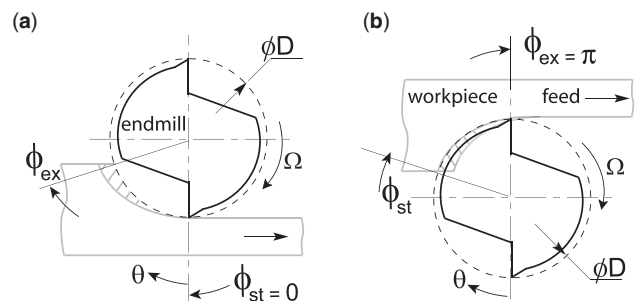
Cutter-workpiece engagement configurations: (a) up-milling and (b) down-milling. Both the cases illustrated are for radial immersion below 50%. The tooth engagement angle is designated ϕ . The entry angle is ϕ_{st} and the exit angle is ϕ_{ex} . Total tooth engagement is $(\phi_{ex} - \phi_{st})$.
